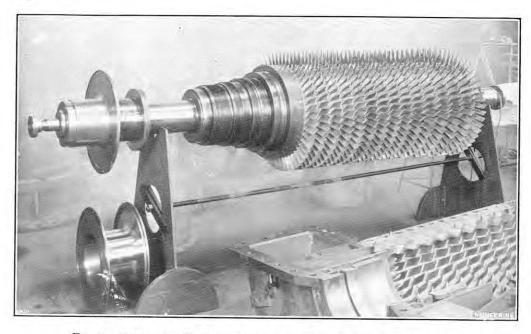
Rotor and Part of Cylinder of High-Pressure Compresson.
